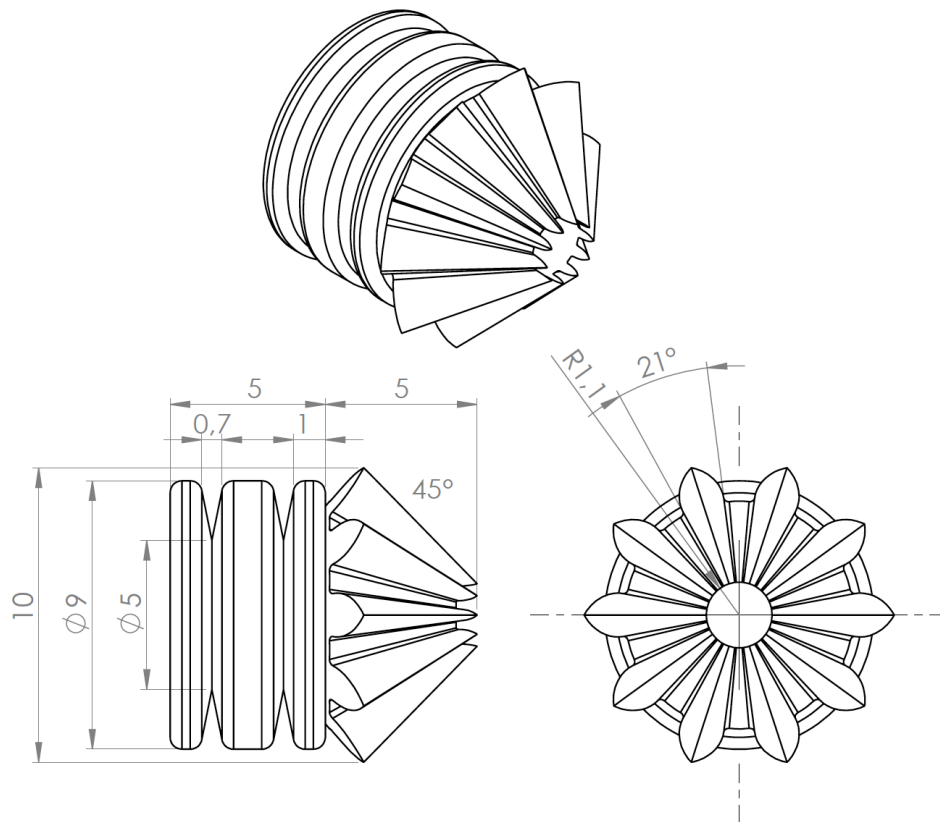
Selection of component views and dimensions (mm), C8 - Gears (2)
